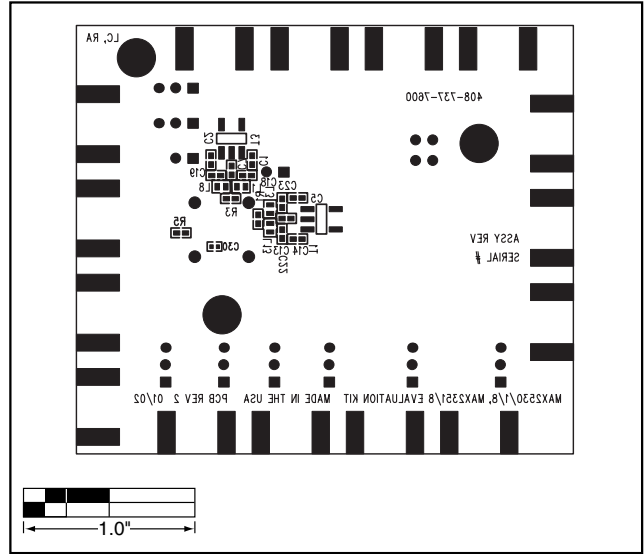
MAX2530/MAX2531/MAX2538 EV Kits Component Placement Guide—Solder Side
